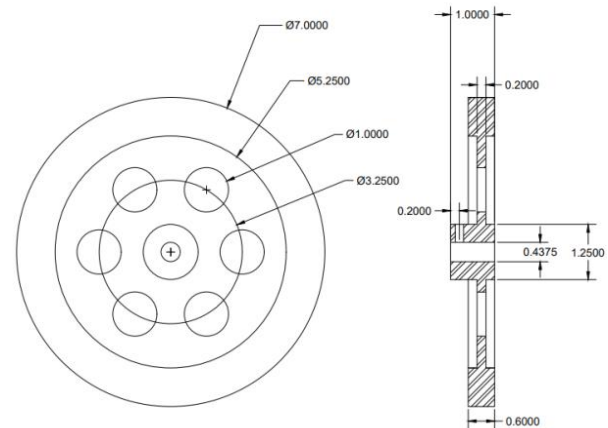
Model of the flywheel with dimensions and designed in AutoCAD
